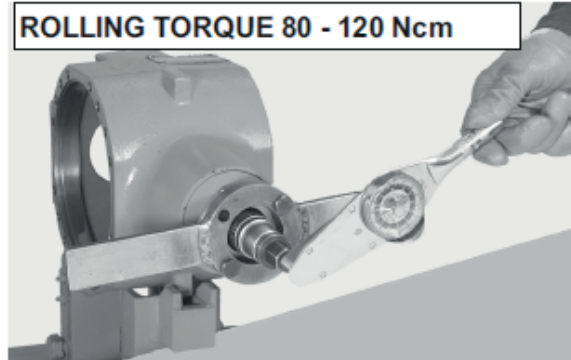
Apply onto the pinion (1) the bar - hold and with the help of a torque meter, check the torque of the pinion (1). Torque: 80 - 120 N-cm
